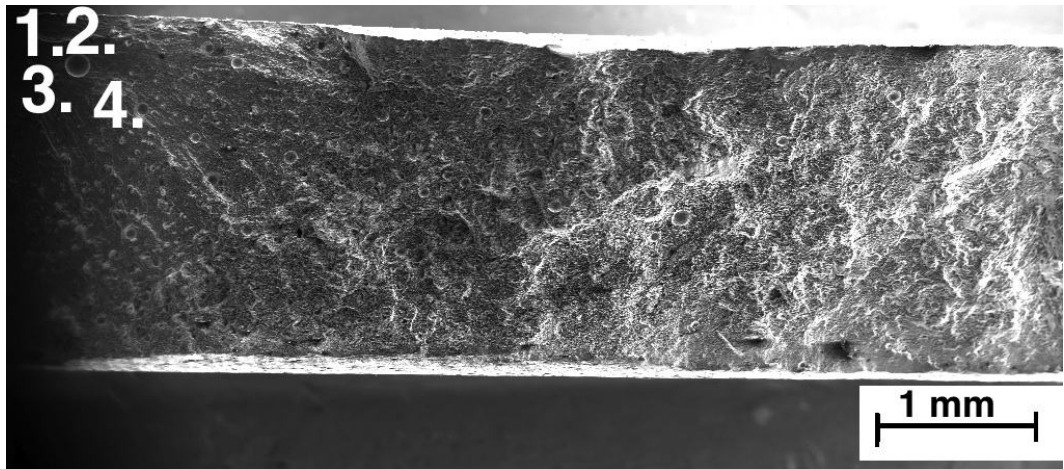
Overview of the fracture surface of as welded AA6082.52-T6 with most cycles to fracture. The numbers represents the different areas investigated further below.
